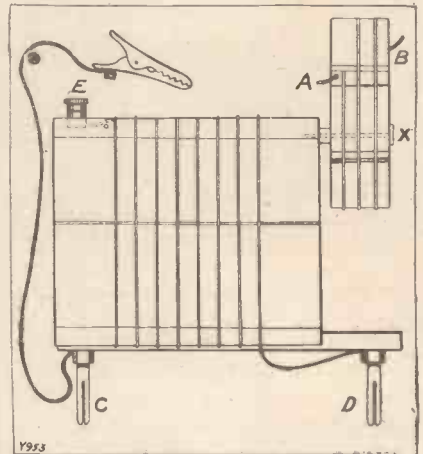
Here you clearly see the arrangement of the short-wave coil windings.
